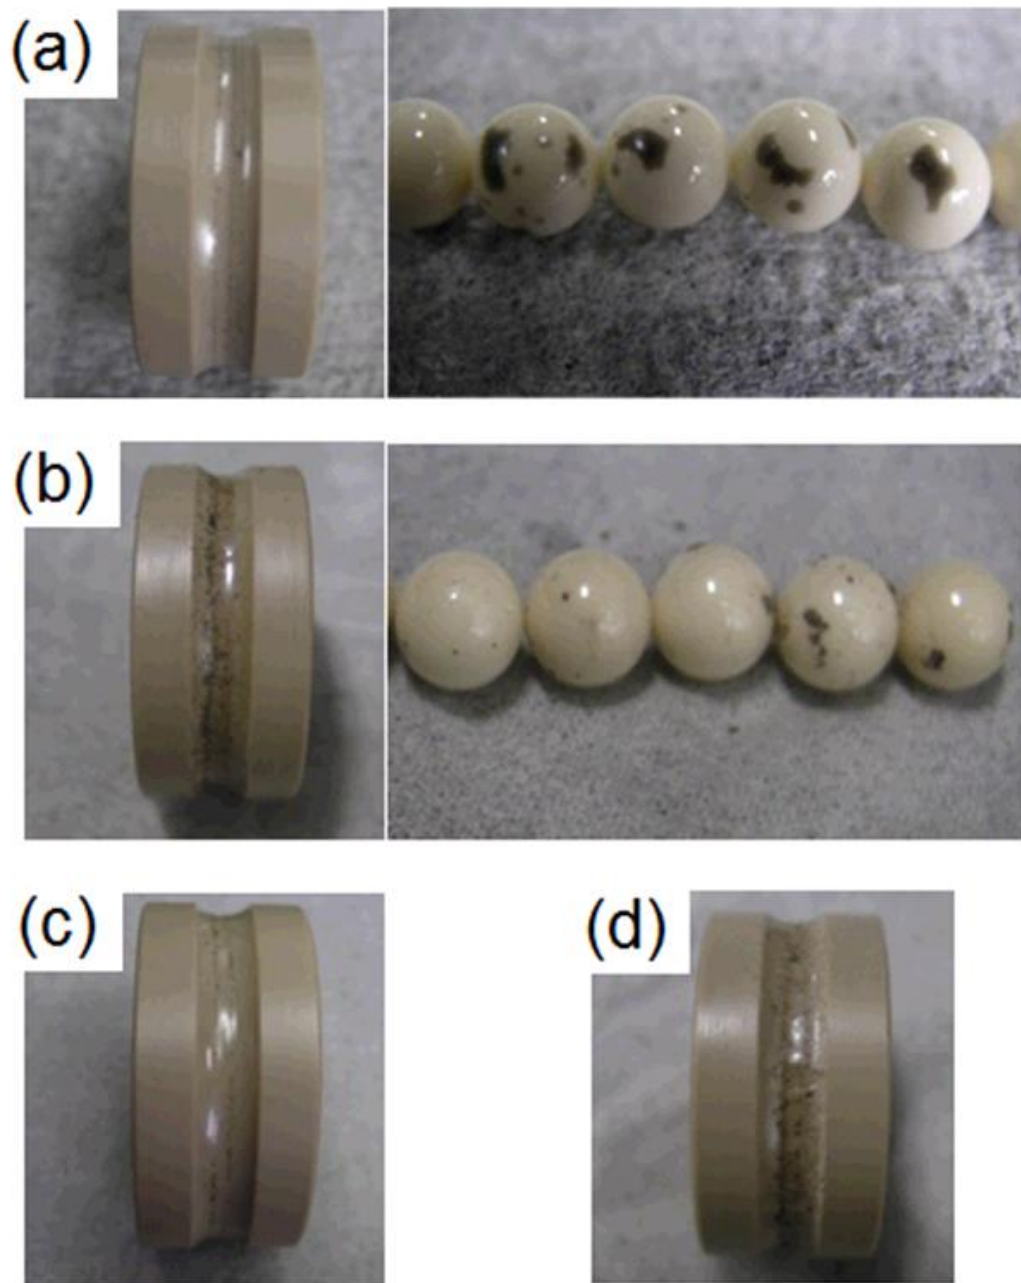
Inner ring raceway after RCF test with 44 N:
